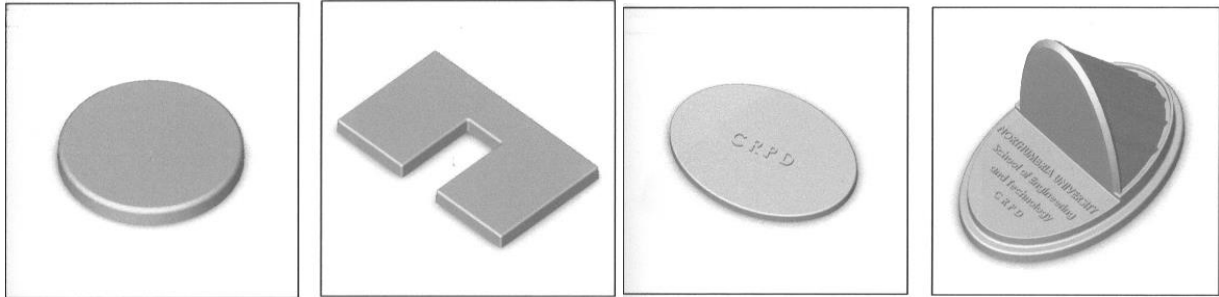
3D design of cylinder, U shape and ellipse test pieces and Millennium Bridge.
